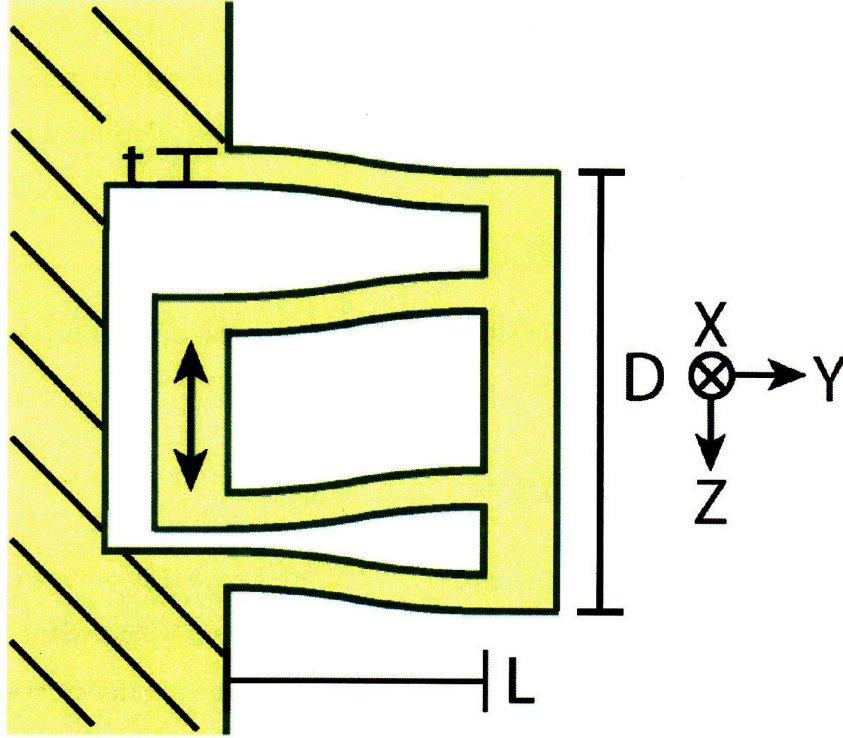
Cross-Sectional Sketch of the Final Flexure
